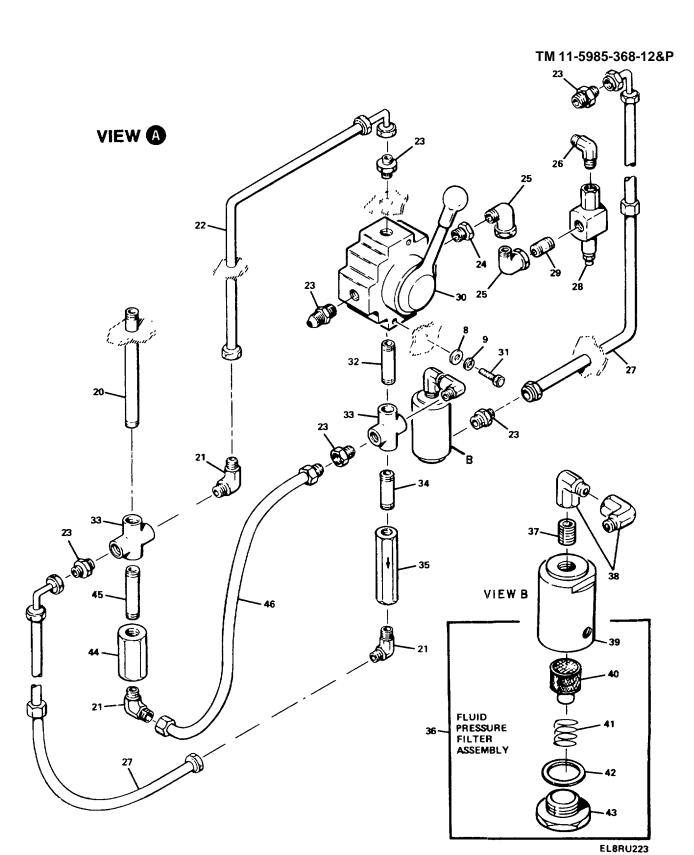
Hydraulic Component Assembly (Shroud) (Sheet 2 of 2)
